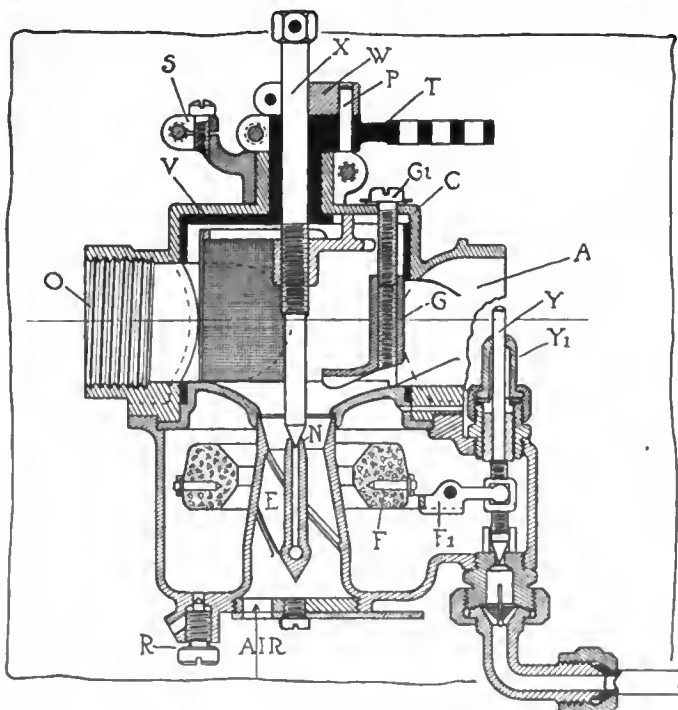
E. C. B. carbureter with sleeve type of throttle
